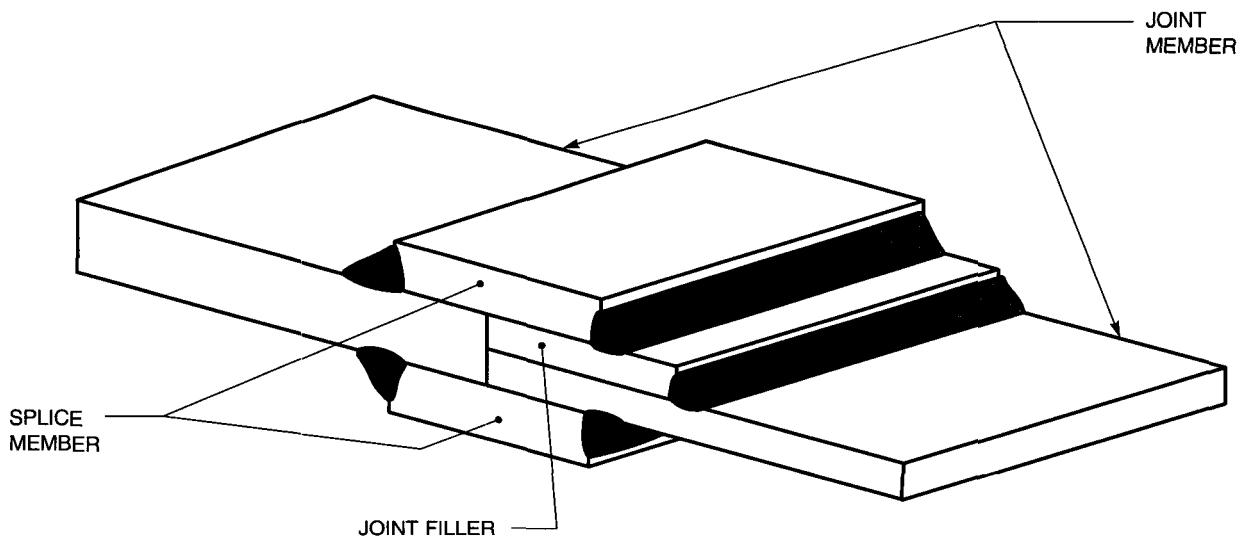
Double-Spliced Butt Joint with Joint Filler
